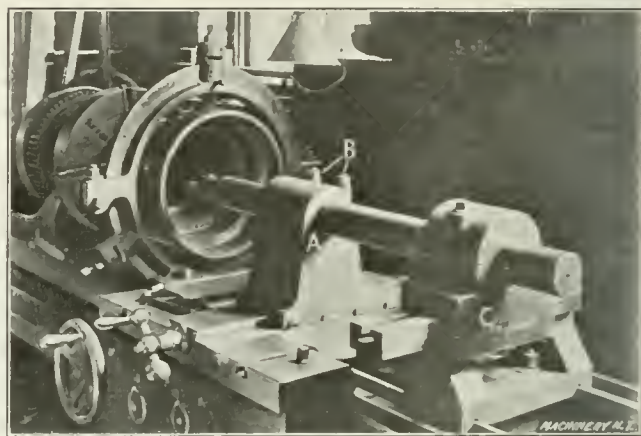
Equipment for Boring the Inside of Cone Pulleys
